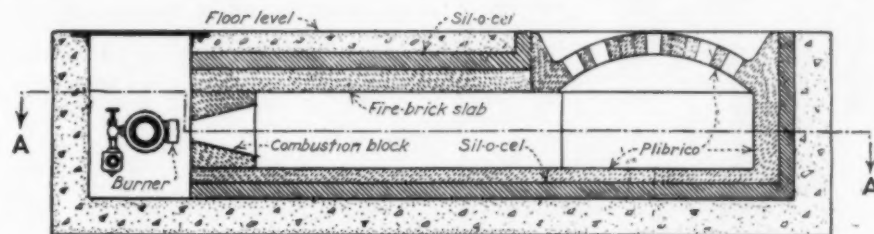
Sectional Elevation of Radiant Heat Furnace
